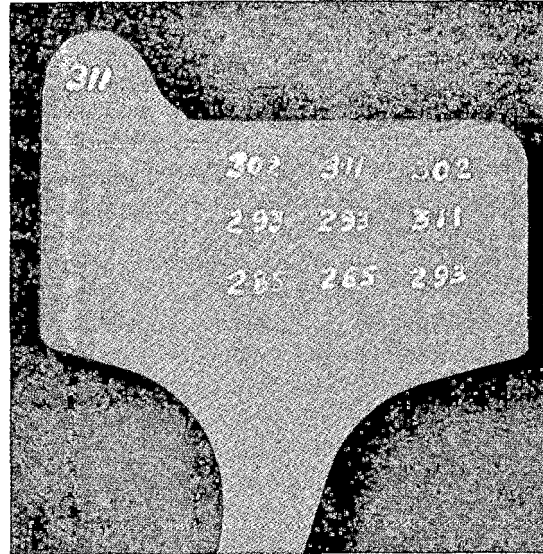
Hardness survey and heat affected zone of wheel No. 8925 braked with clasp cast metal brake shoes
